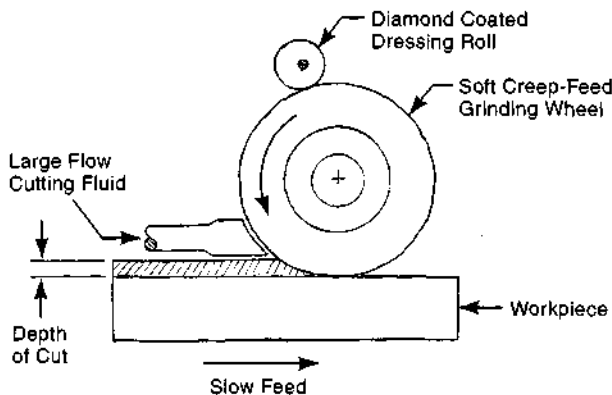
C3c Creep feed grinding. Note the slow feed, large depth of cut, soft wheel, and heavy flow of cutting fluid.
